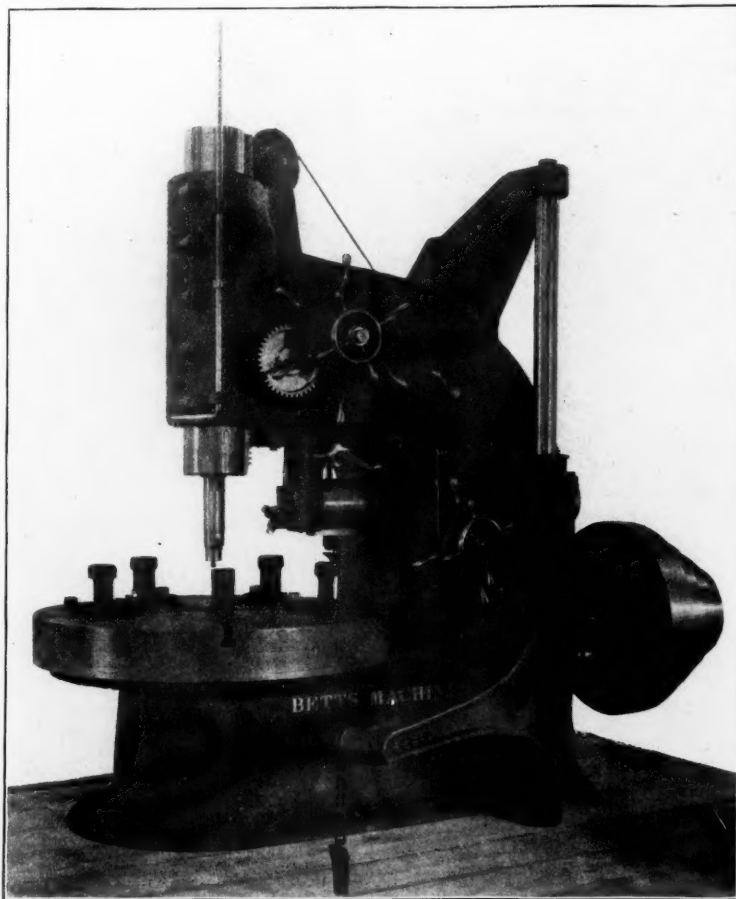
The Betts 52-in. Car Wheel Boring Machine.
